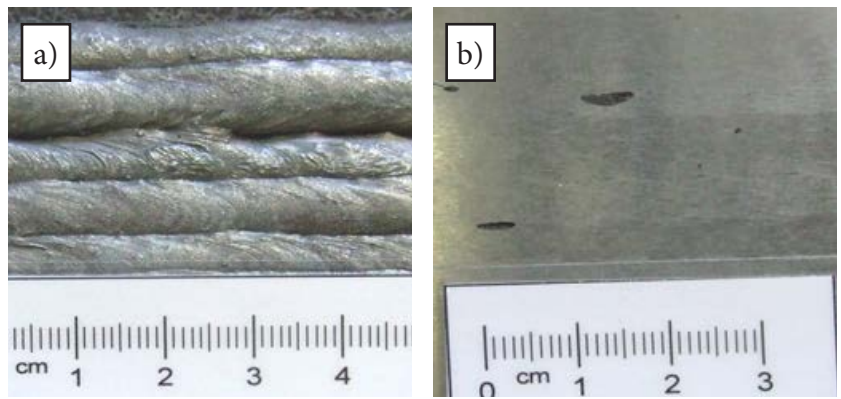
Irregular excess weld metal of the multi-run surfaced layer: a) condition after surfacing, b) duct on the mechanically treated surface formed by the insufficient amount of the filler metal on the interface of the runs [2]
